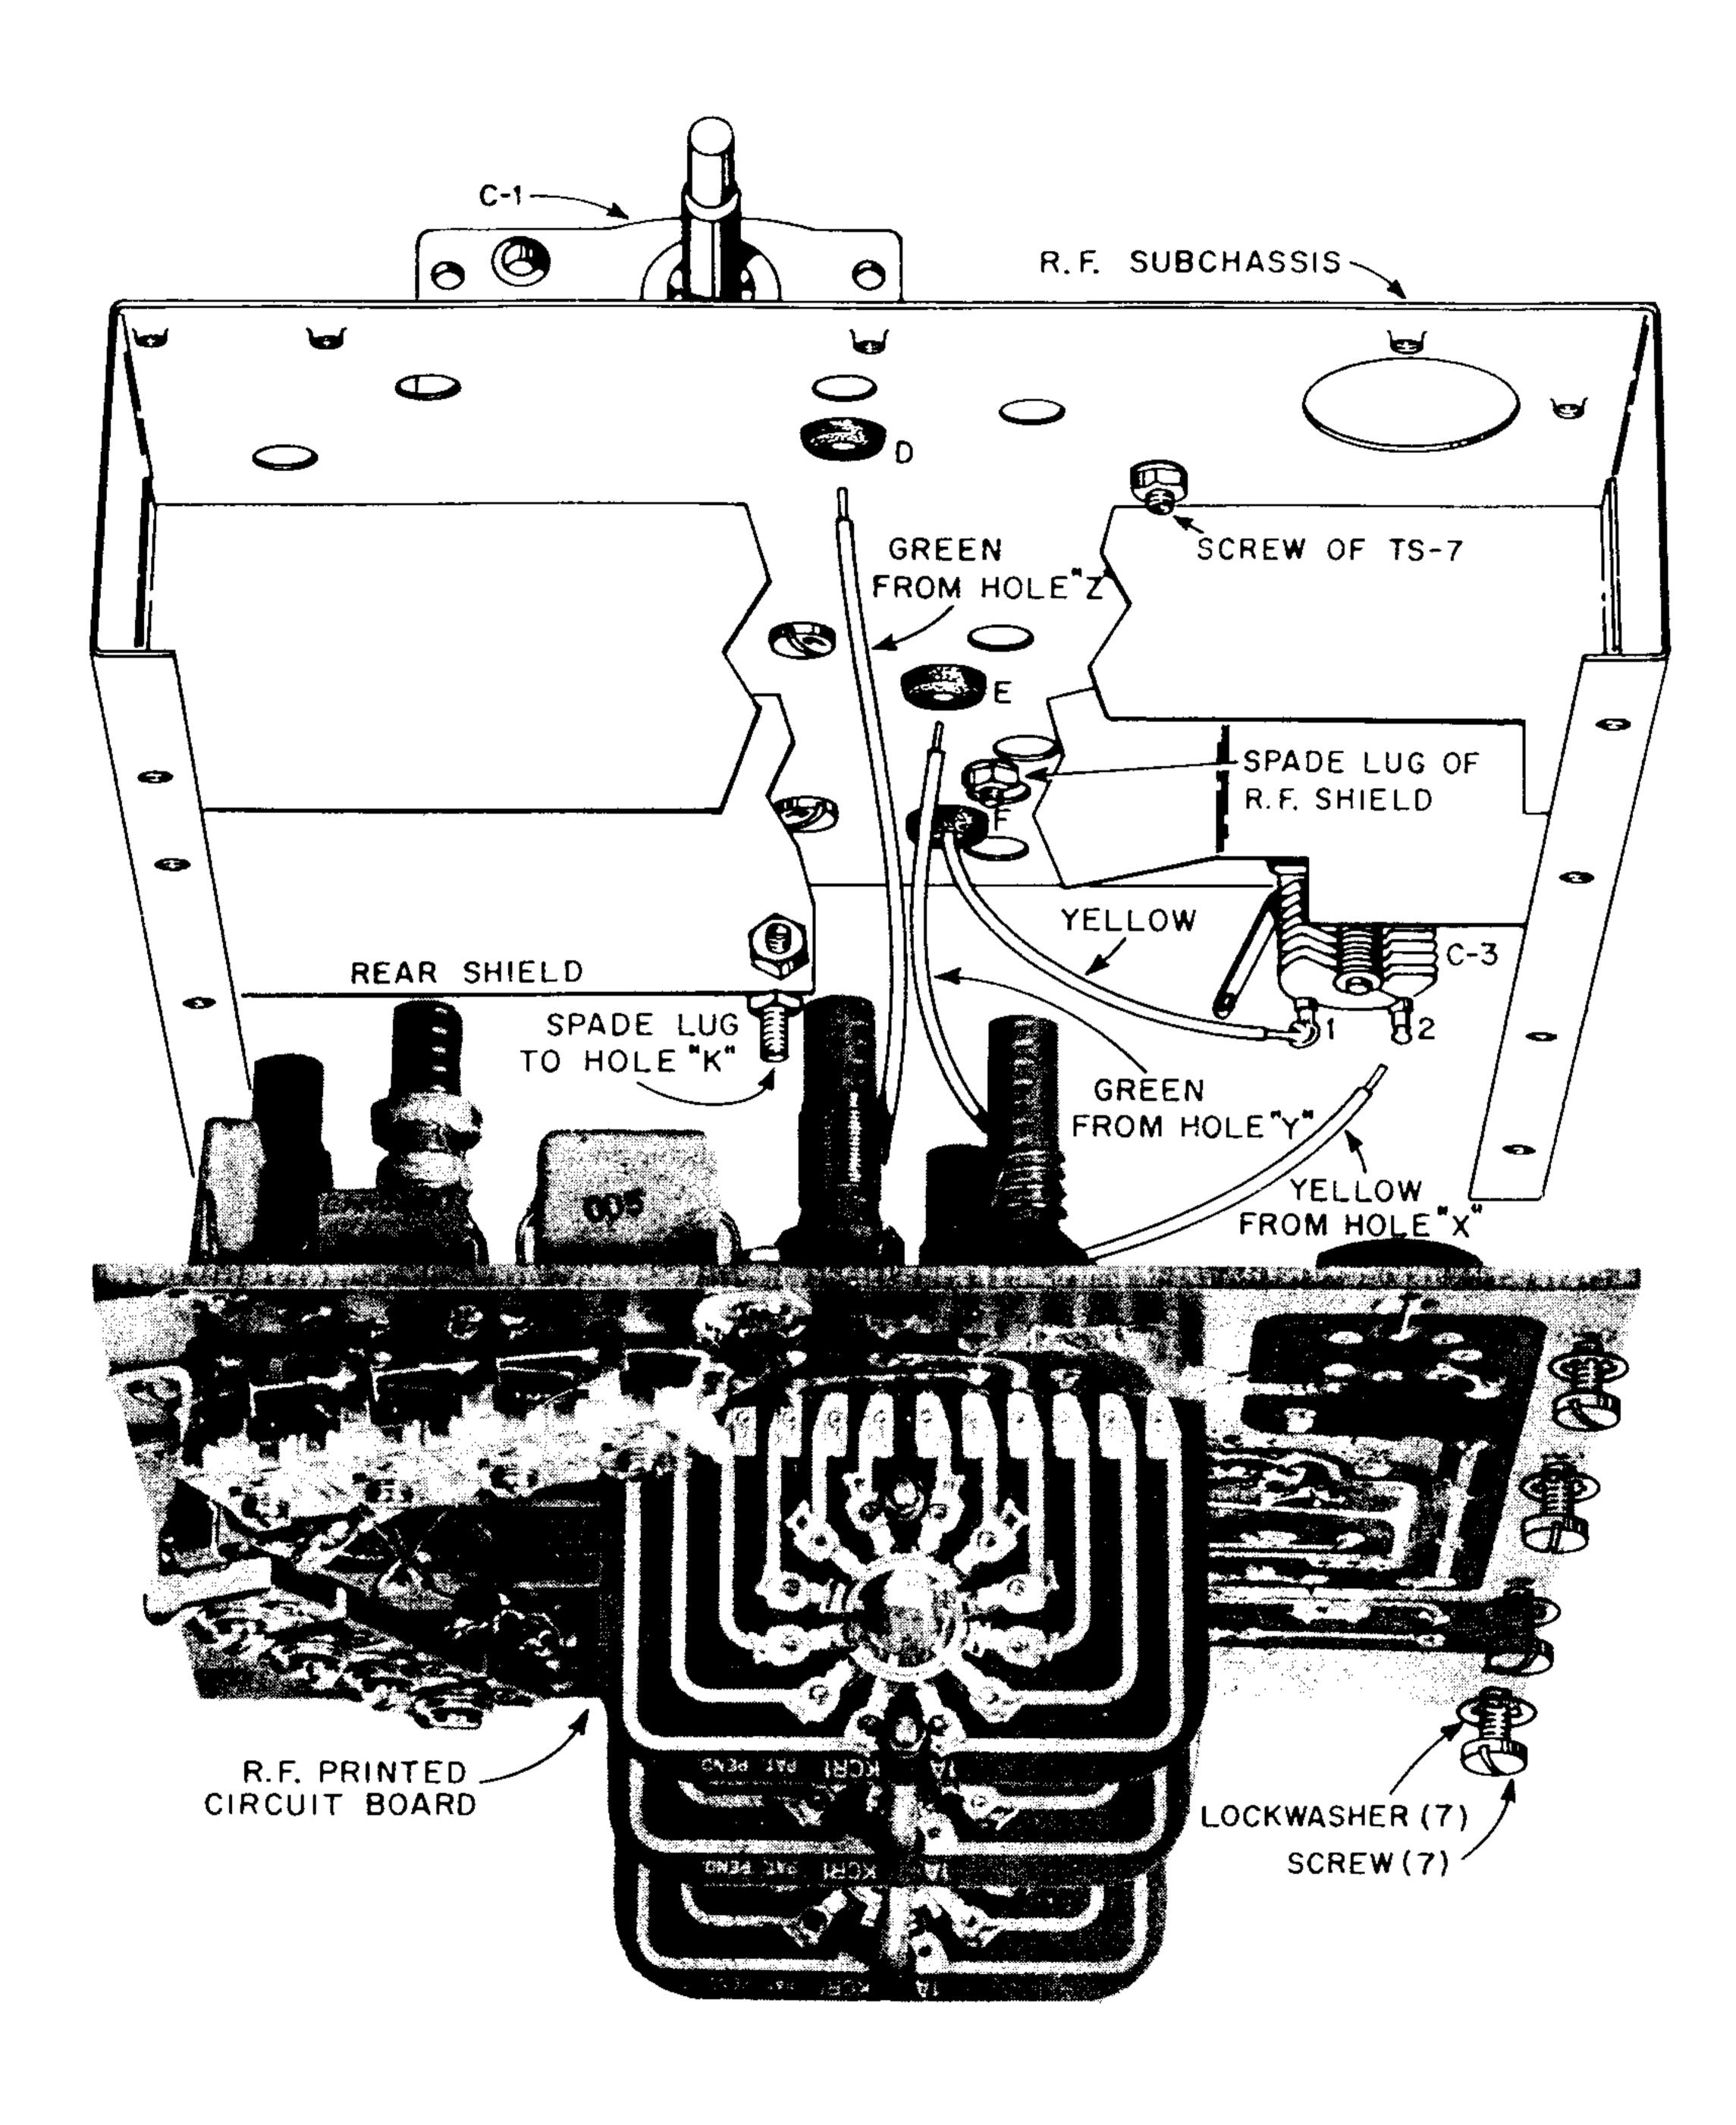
MOUNTING THE RF SUBCHASSIS
